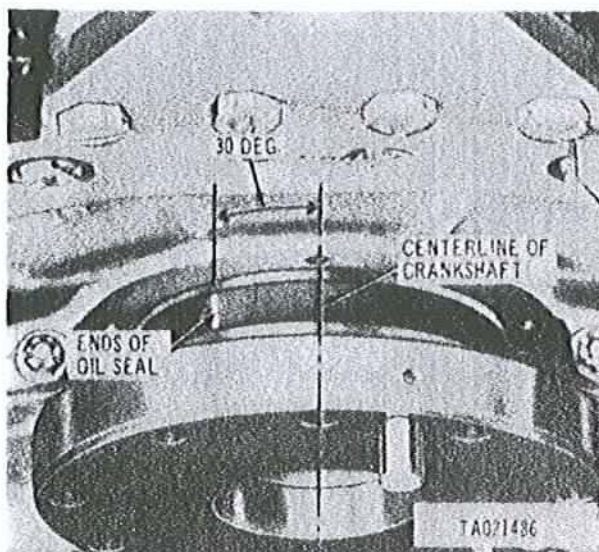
Correct position for crankshaft oil seal split line before installing seal retainer.
